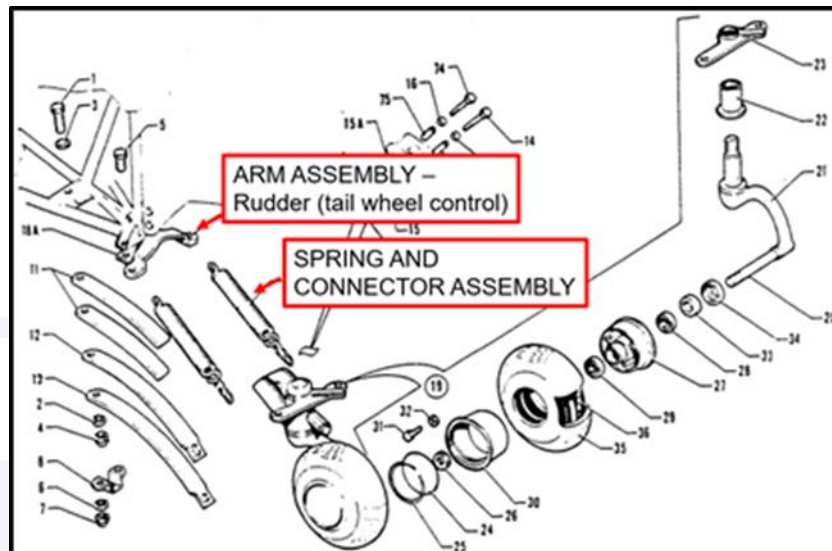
Pictographic description of the tailwheel assembly, highlighting the set of springs, connectors, and arm connection to the steering rudder, extracted from the IPC (Illustrated Parts Catalog).
